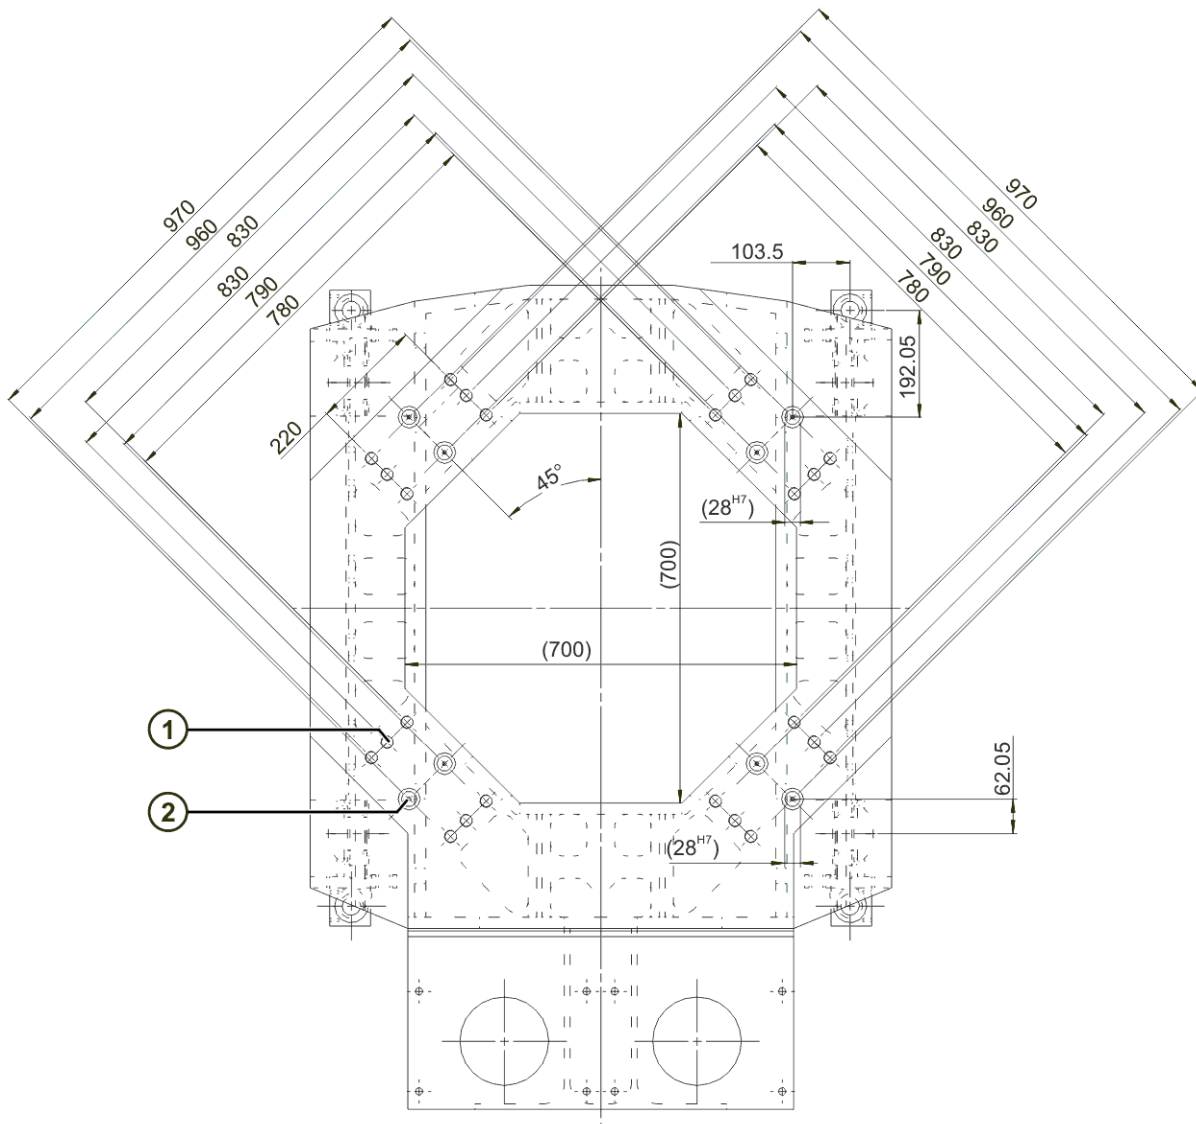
Mounting face for KR 30 to KR 500, robot mounted at 45°
